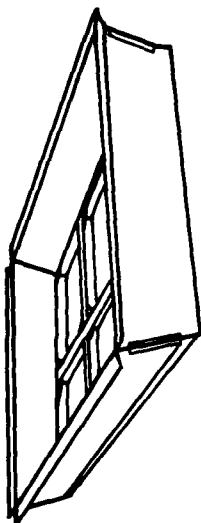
LDEF Peripheral Tray Assembly, 6-in. Depth
